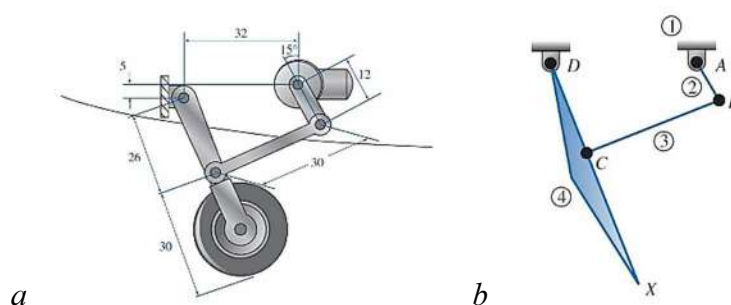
Mechanical system: a – nose wheel assembly; b – kinematic scheme [1]
